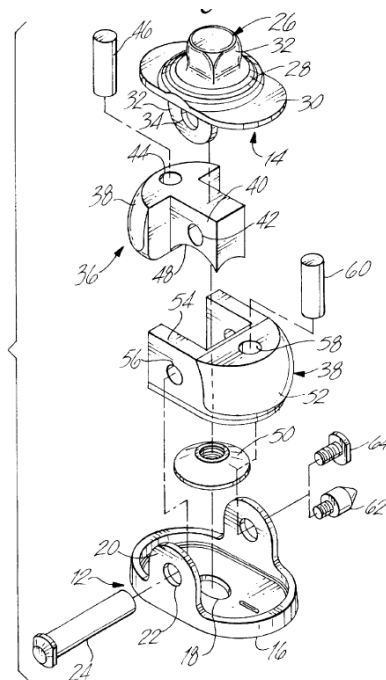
Exploded view of multi-axis prosthetic ankle joint [14]
